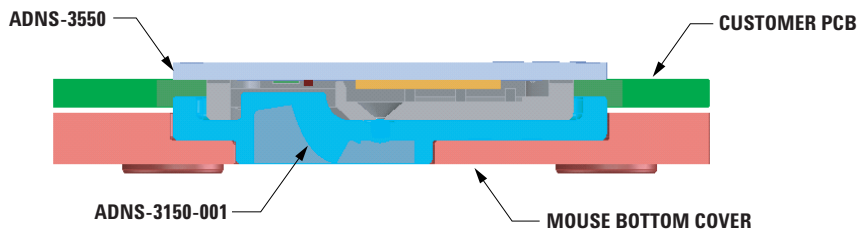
2D assembly drawing of ADNS-3552 (mounted on the top side of customer PCB)
